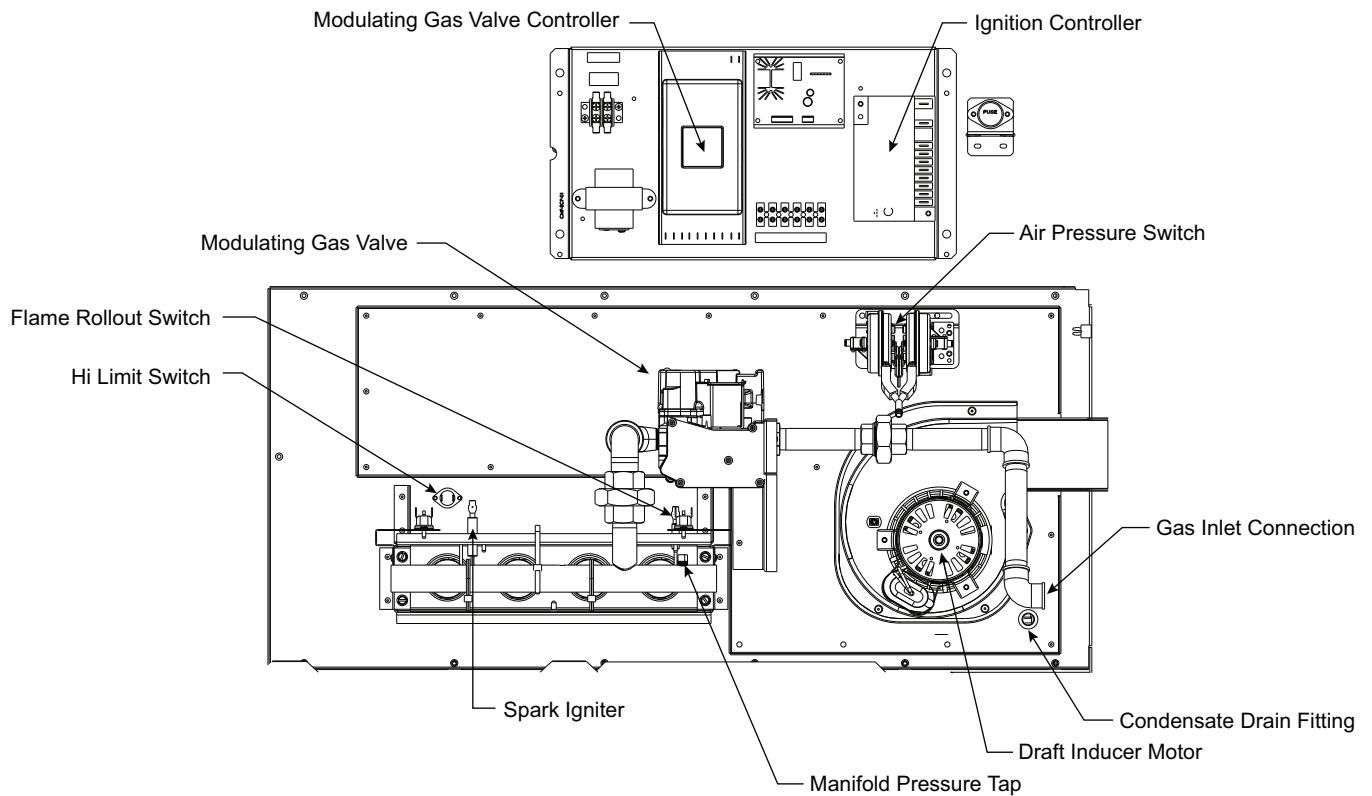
48WE(4,5,6)H — Gas Heat Component Location and Identification (Size 07 Shown)
